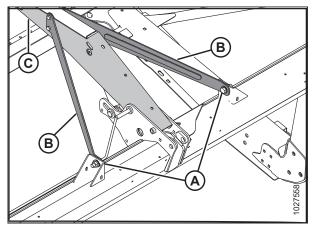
Center Support Arm and Braces – Double Reel Only
